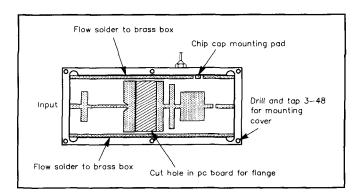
Top view of the case with a board installed. Run a continuous bead of solder around the perimeter of the board to provide a good RF ground. A hole cut in the center of the board provides clearance for the device mounting flange. A piece of copper-clad board or thin, sheet copper can be used as a cover.
